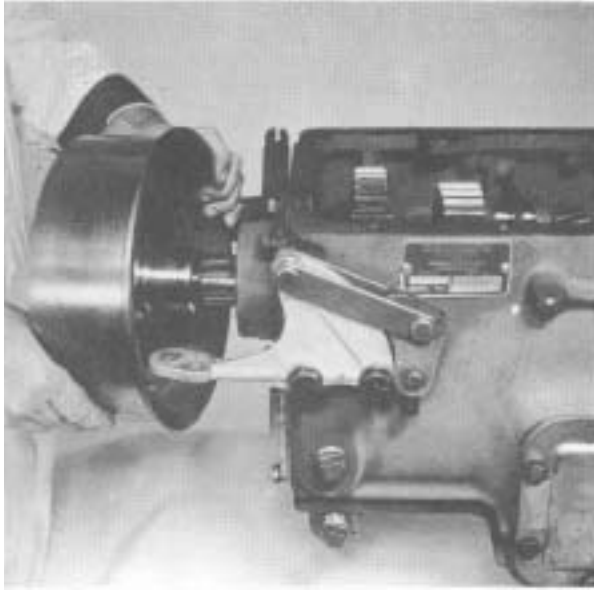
Install drum and flange assembly, brake locating bracket, and anchor support bar.
